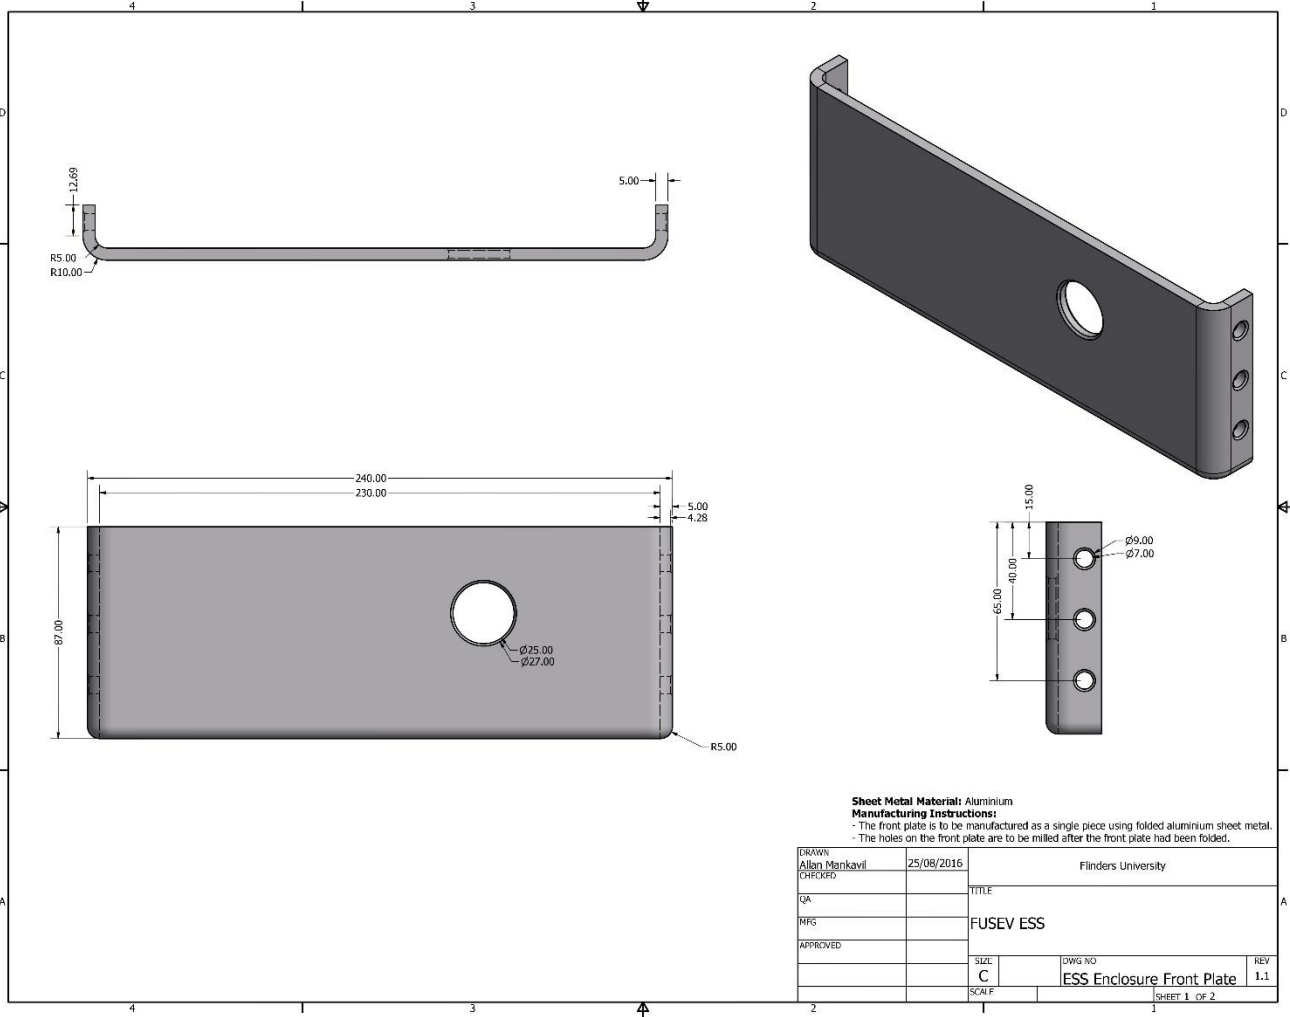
The mechanical drawing of the ESS Enclosure's folded Front Plate.
